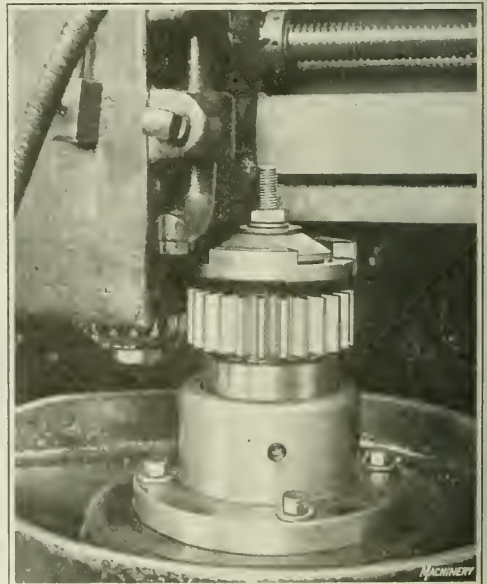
Cutting Gear that forms Integral Part of a Sleeve and is Cut Close to a Shoulder
